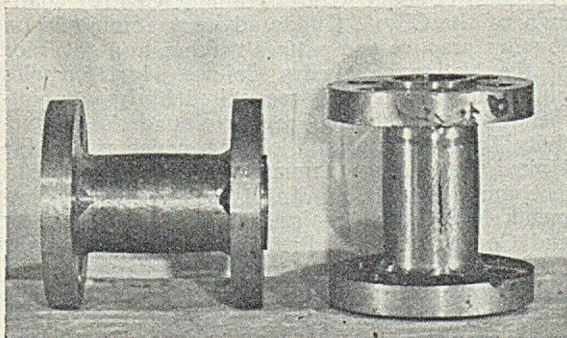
TEST-PIECES (CASTINGS) USED FOR BURSTING TESTS.
